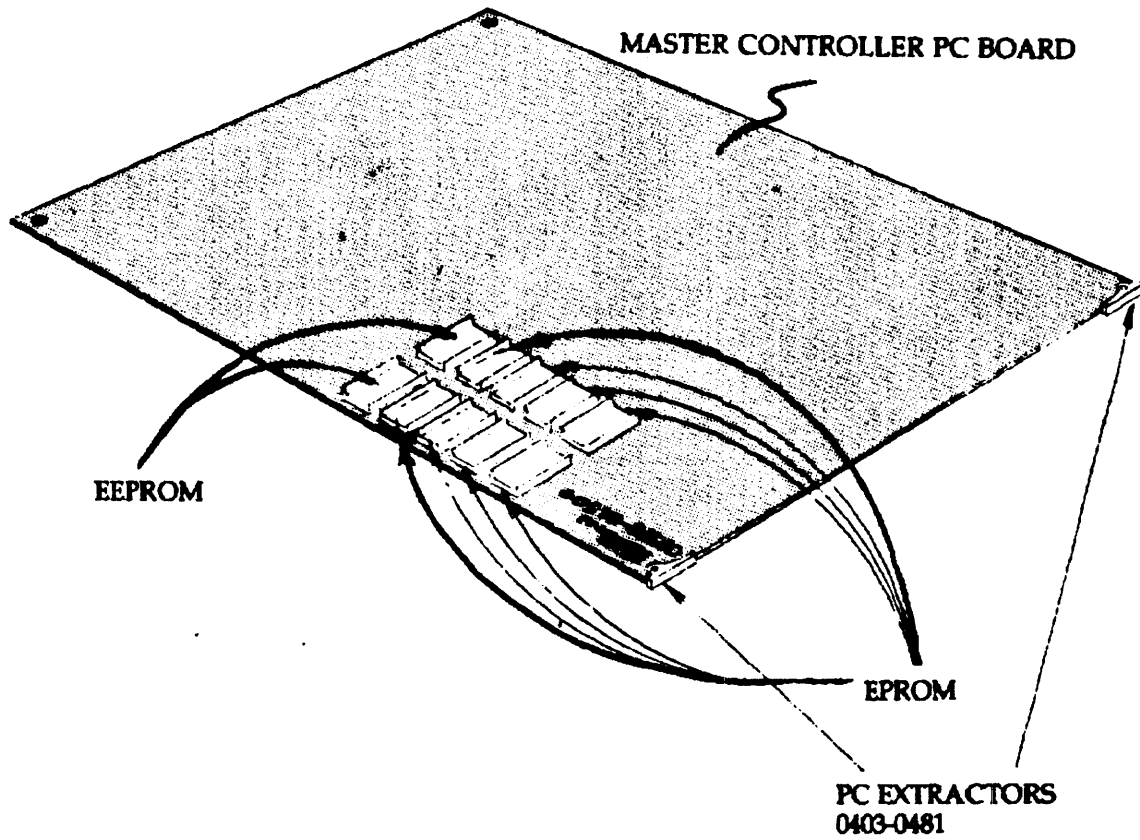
2-35 Master Controller Board EPROM and EEPROM Sockets
